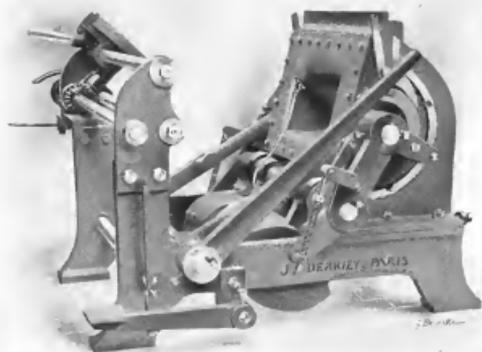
Casting-press for semicylindrical plates; water-cooled with automatic closing and head-cutting gear. [To face plate XCVI.]
